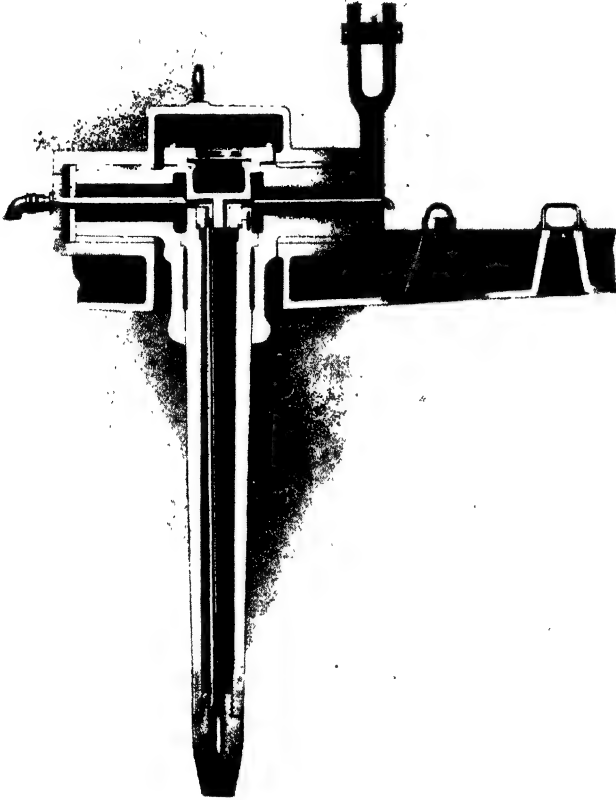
DETAIL OF POKER OF WELLMAN (HUGHES) MECHANICAL PRODUCER.
